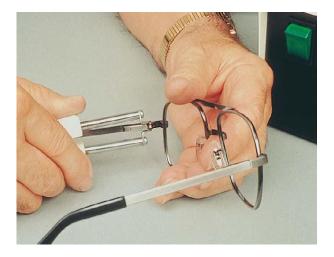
A soldering iron or Hot Fingers unit held on the tip of a previously sealed screw will often allow the screw to be removed normally. (Courtesy Hilco, Plainville, Mass.)
